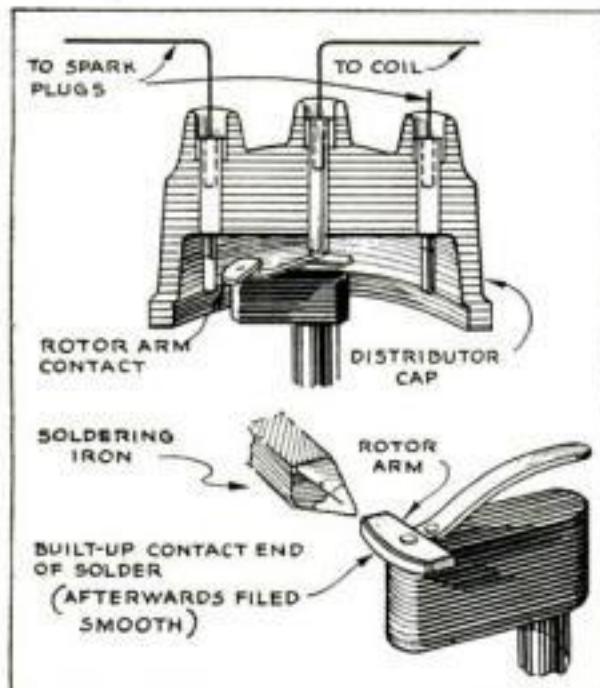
Shows how to build up, with solder, the burned away end of distributor arm in an old car and make it run.
